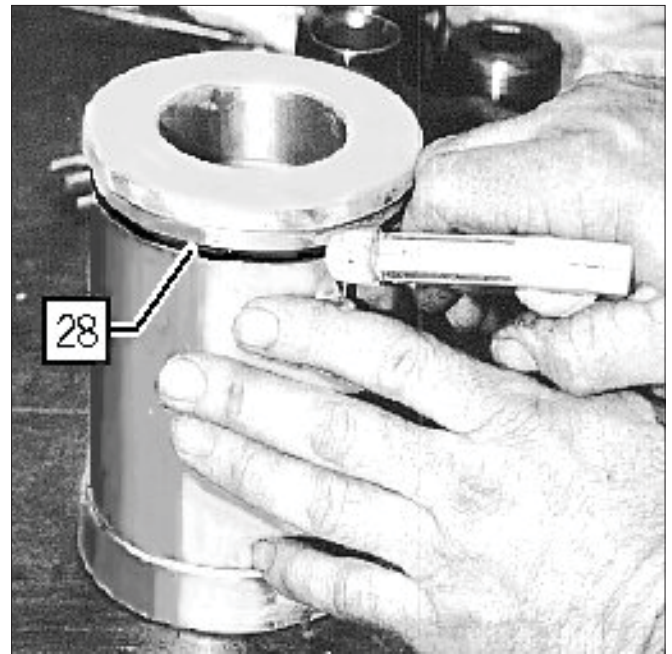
Front Cylinder Bushing–O-Ring Installation
